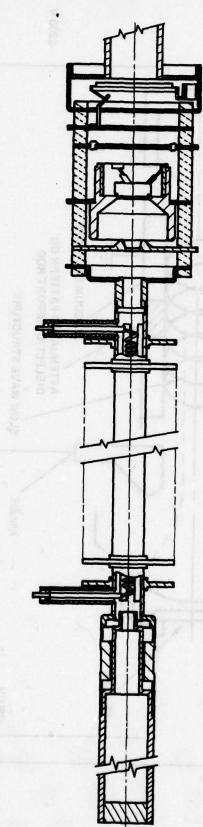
THT VACUUM ASSEMBLY
